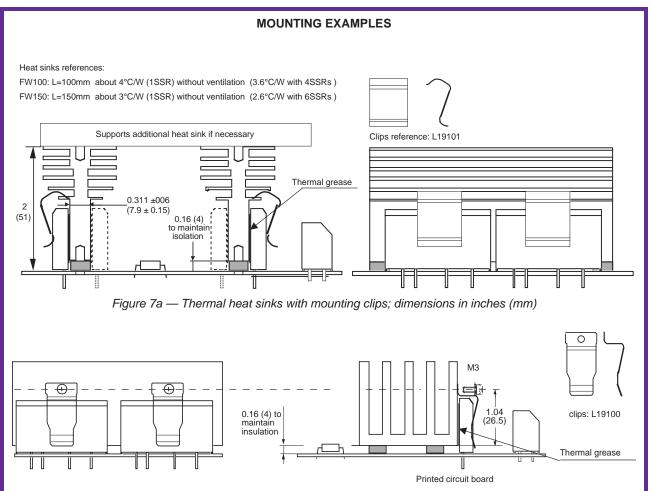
Clips with screws on standard heat sinks; dimensions in inches (mm)
